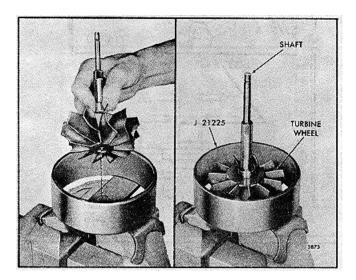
Installing Shaft Assembly in Holding Fixture
